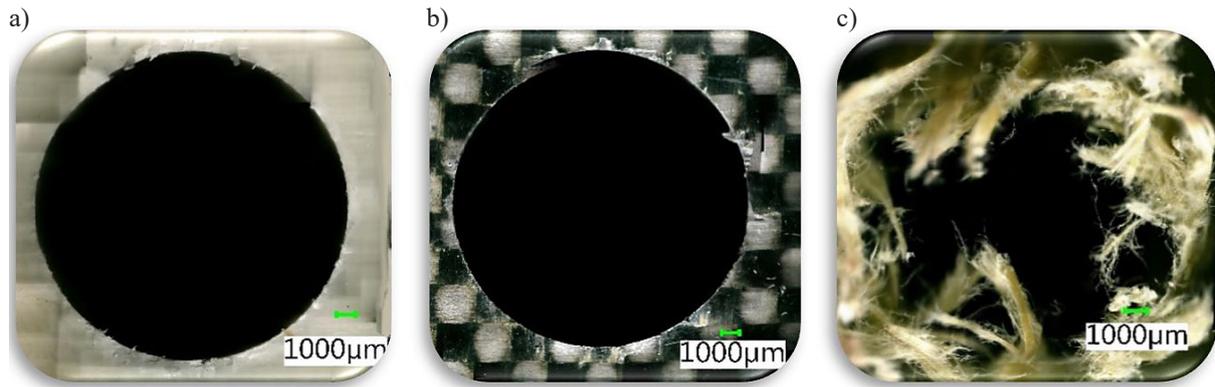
Image of a hole in the tool exit zone, drilled in GFRP (a), CFRP (b) and AFRP (c)
